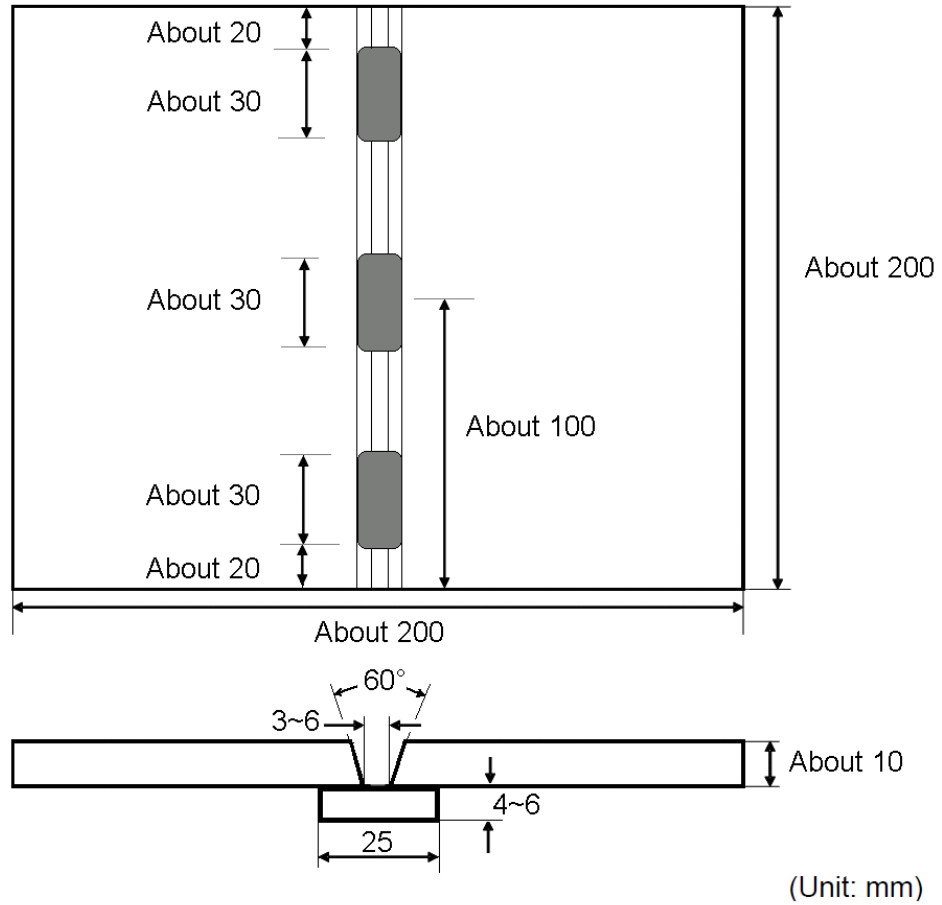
Dimensions and types of test assembly for tack butt welds
